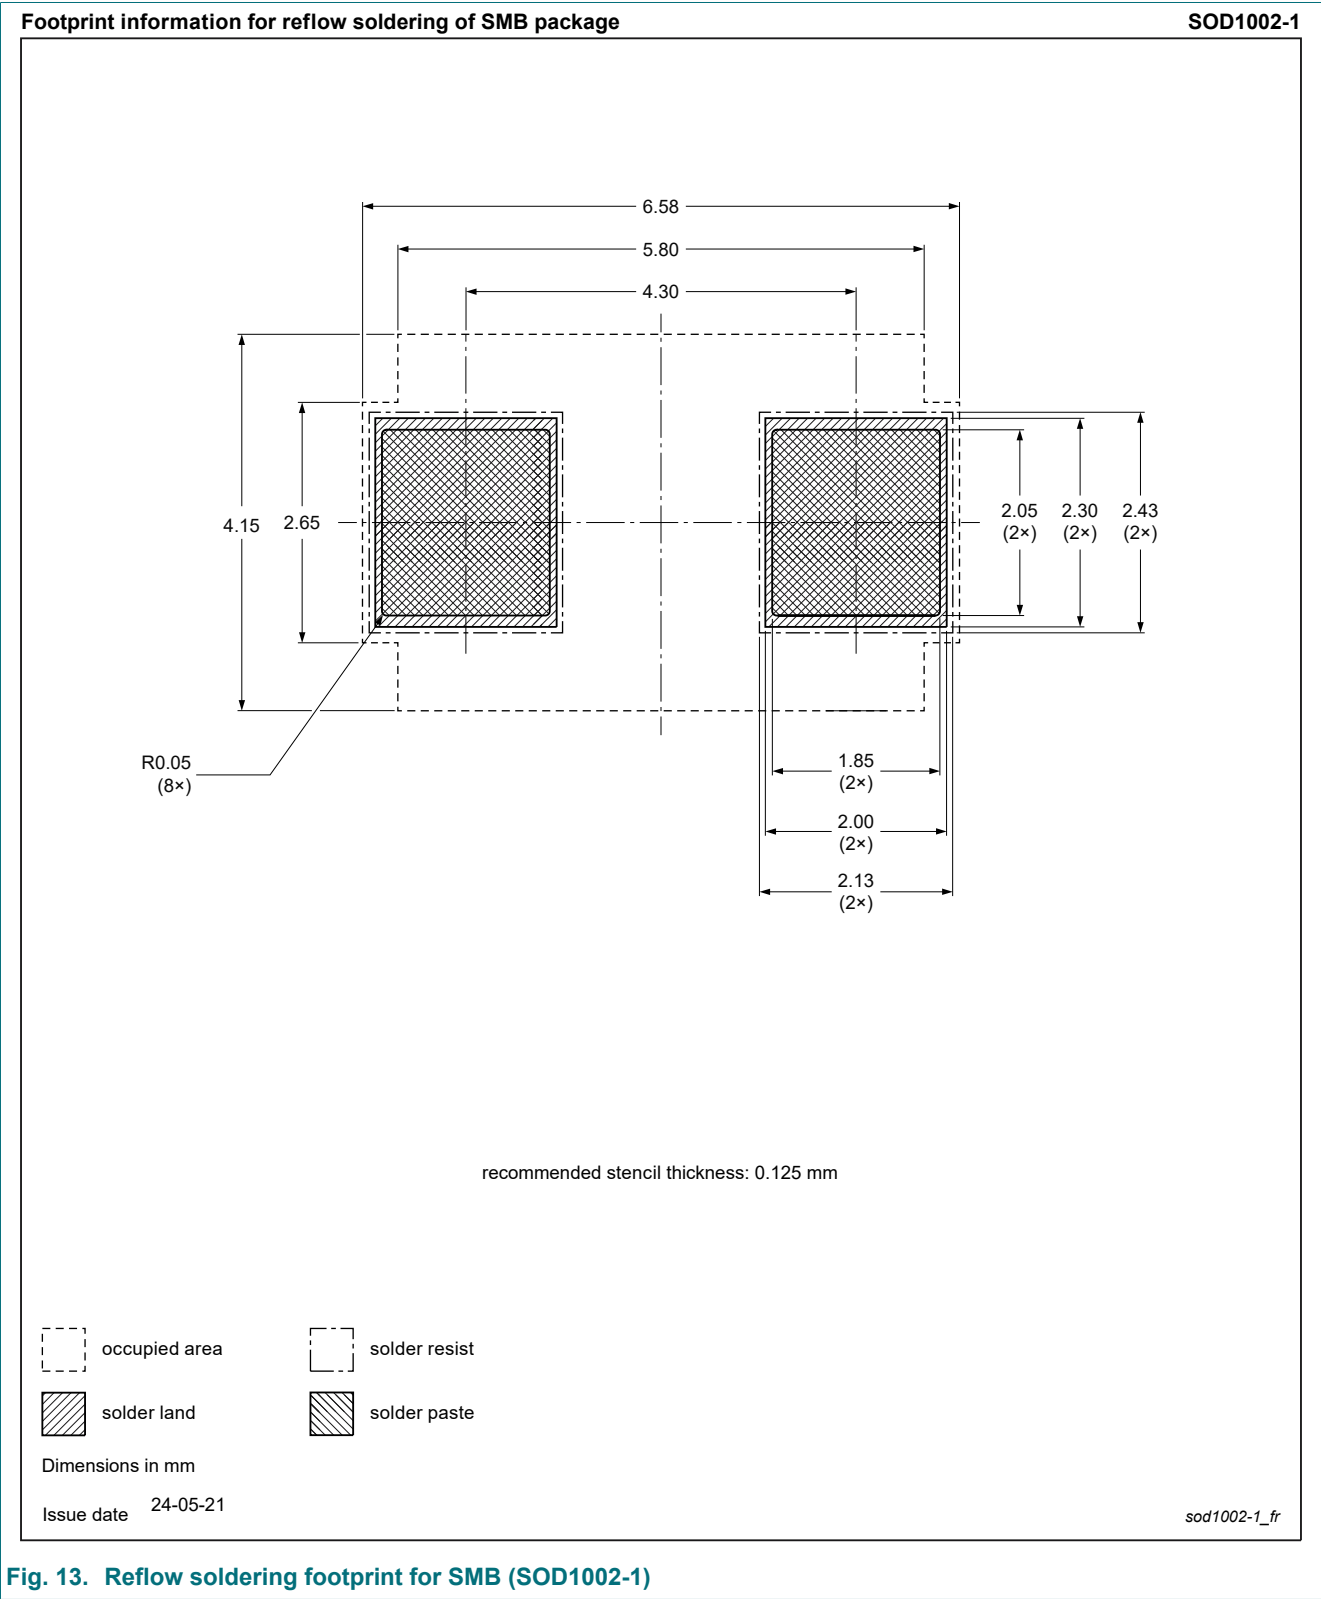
Reflow soldering footprint for SMB (SOD1002-1)
